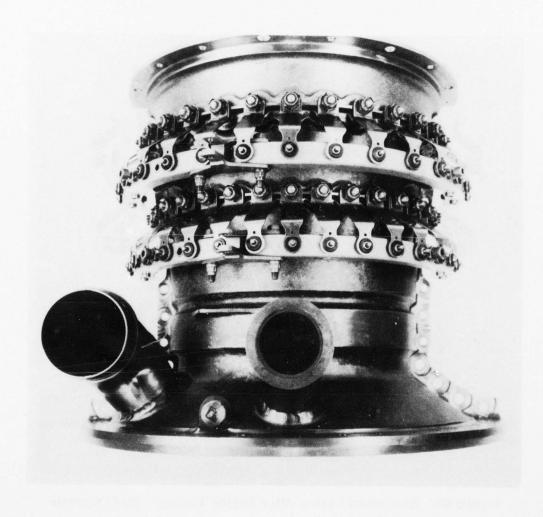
Assembled Casing After Engine Testing - Outer Contour
